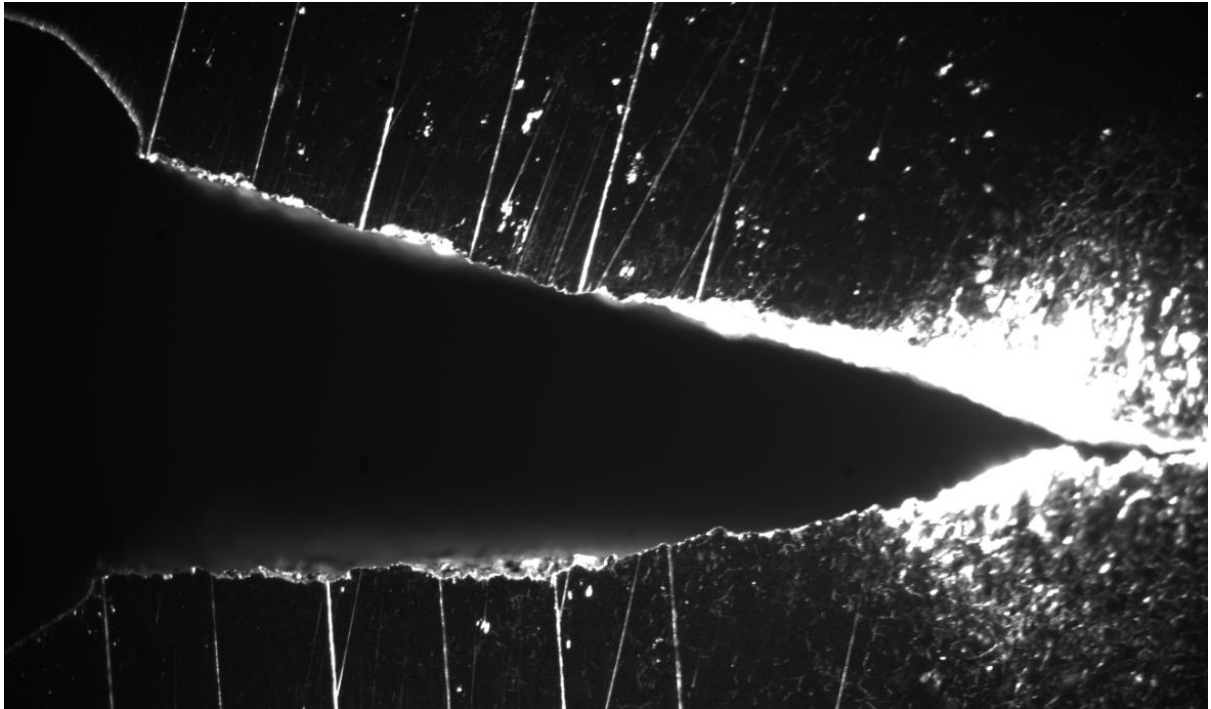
XY9 fatigue crack (initial)
